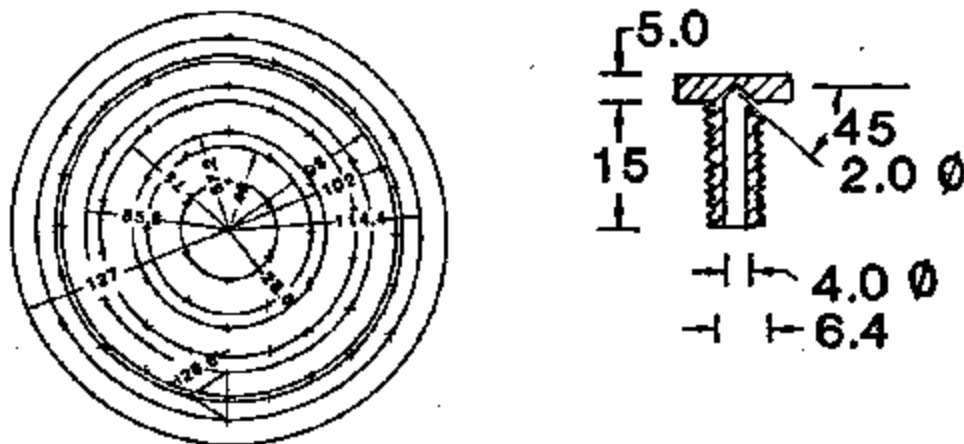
Arrangement of the bubble-caps on the distributor plate. All dimensions are in mm.
